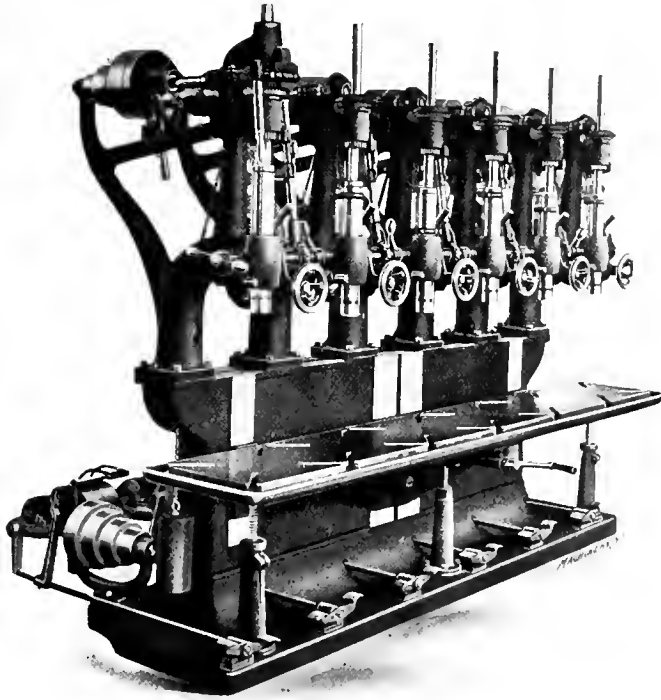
Twenty-inch six-spindle gang drill, built by the Mechanics' Machine Co., Rockford, Ill.
